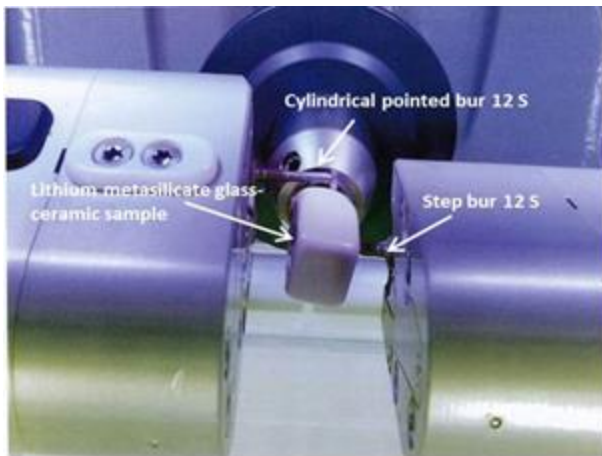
CAD/CAM abrasive machining of a lithium metasilicate glass-ceramic (emax.CAD) block using a chairside CAD/CAM system (CERAC AC, Sirena) in which two milling units with diamond burs are used.
